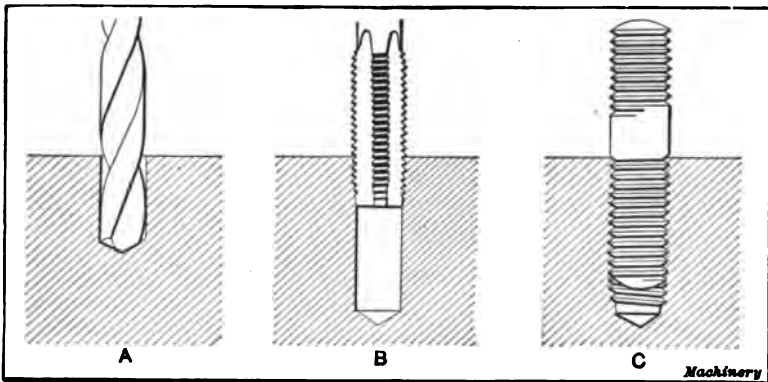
(A) Tap Drill. (B) Tap for Threading Hole. (C) Stud inserted in Threaded Hole
